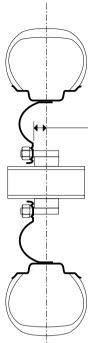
CROSS SECTION OF TYRE WHEEL AND HUB TUBE SHOWING CENTERING OF HUB TUBE IN WHEEL
